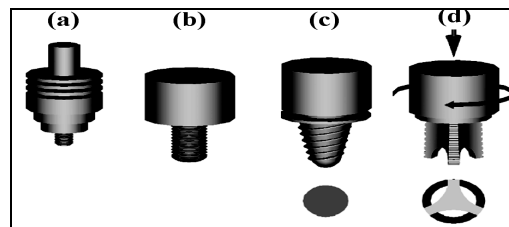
Different Friction stir welding tool shapes (a) stepped shoulder with cylindrical threaded pin (b) Cylindrical threaded pin (c) tapered pin (d) flared-triflute pin as reported in [7]
